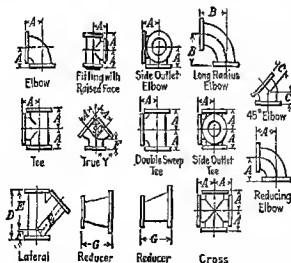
American Standard 25 Lb, 125 Lb, and 250 Lb Cast-iron Flanged Fittings. (25 Lb and 125 Lb Have Plain Face; 250 Lb Fittings Have 1½ In. Raised Face.) See Tables 28 to 34.
